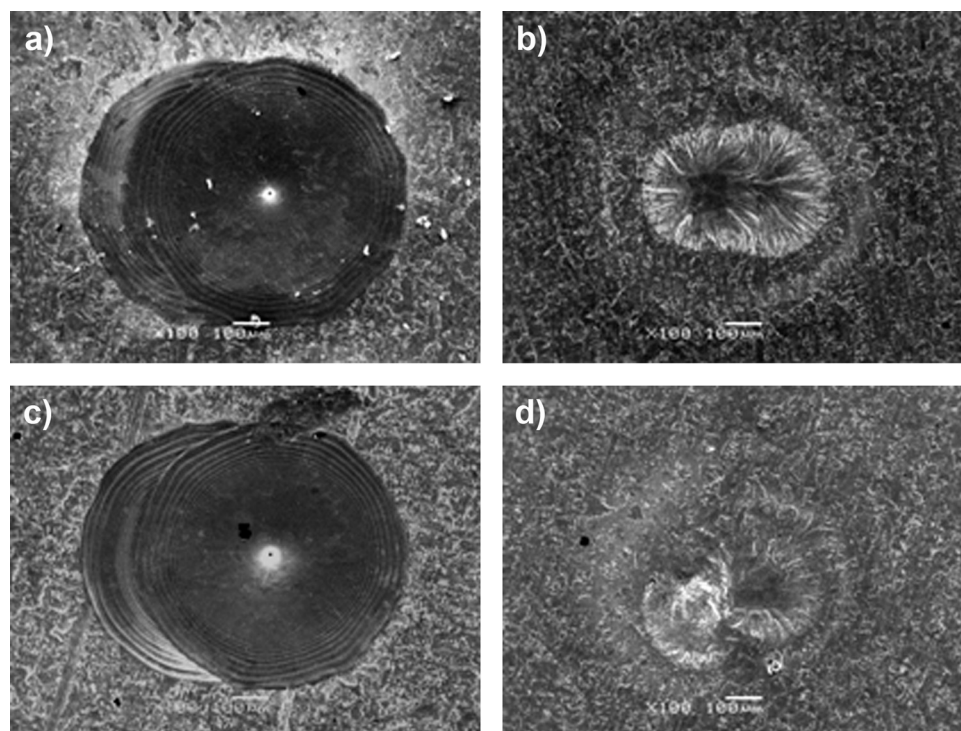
Top (a) and bottom (b) surfaces of welds made with 1.0 kW peak power and 2 ms pulse without electrolyte. Top (c) and bottom (d) of welds made with electrolyte.
